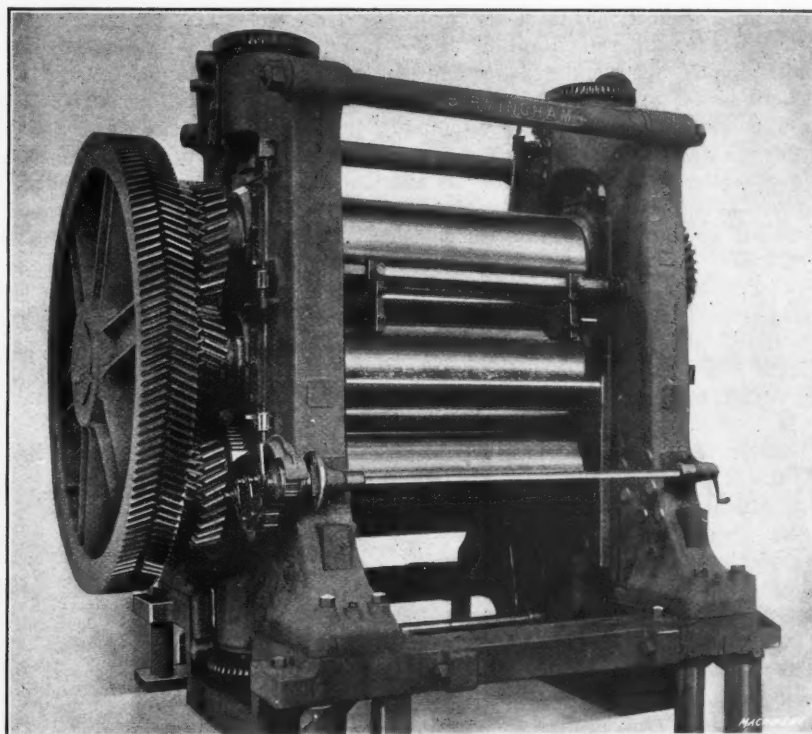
Heavy-duty Three Roll Calender for Rubber Tire Work, equipped with Herringbone Gears
